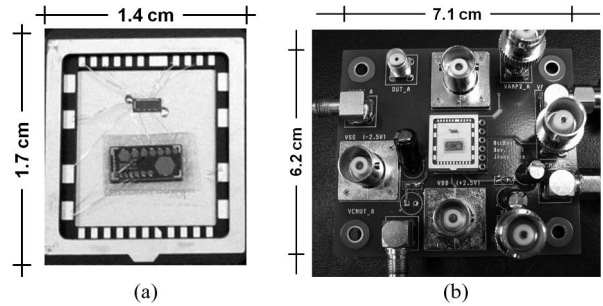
Photographs of (a) chip carrier and (b) PCB.
